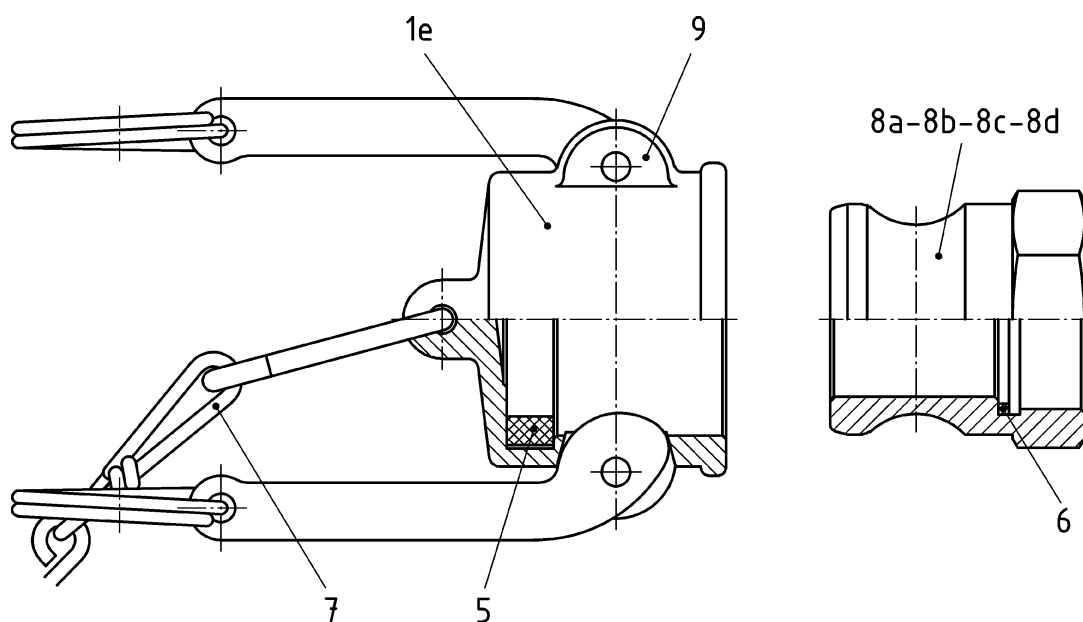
and Figure 2 show examples for cam-locking couplings. A parts list is given in Table 1.
